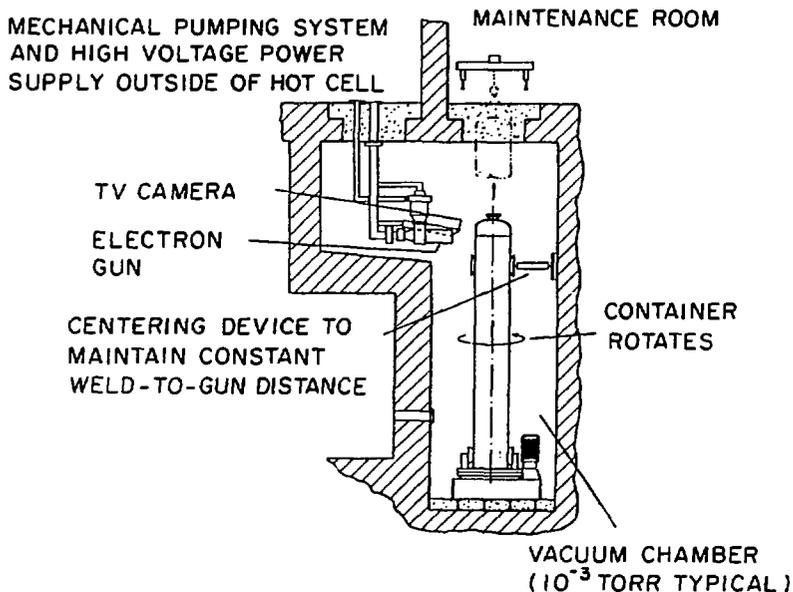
Illustration of Electron-Beam Welding Machines
